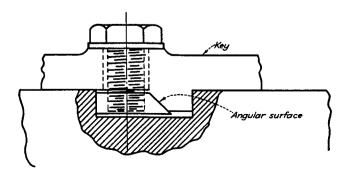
The lower edged of the bolt head contacts the angular side of locating groove, causing the keys to be held tightly against the opposite side of the groove. This design permits easy removal of the clamped part, but it is effective only if the working pressure is directly downward or in a direction against the perpendicular side of the slot.
